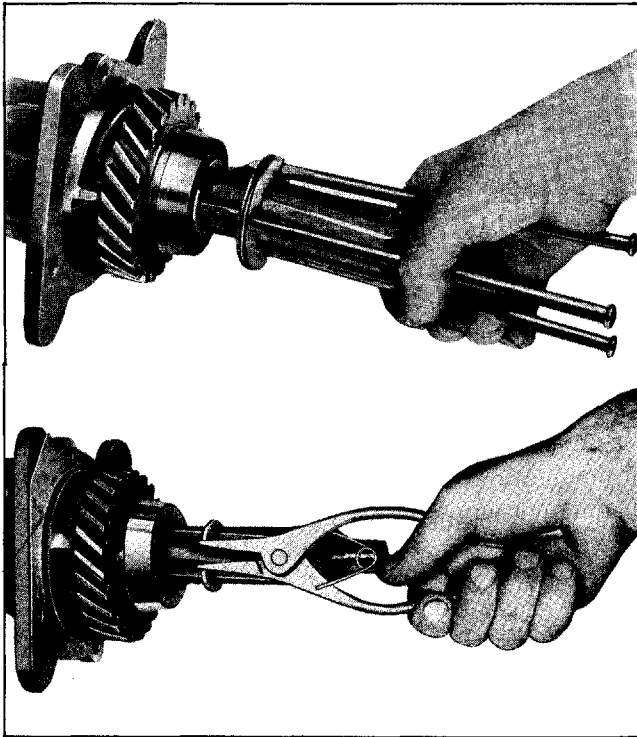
Removing or Installing Snap Ring Using Tool J-1130 or KMO-630
